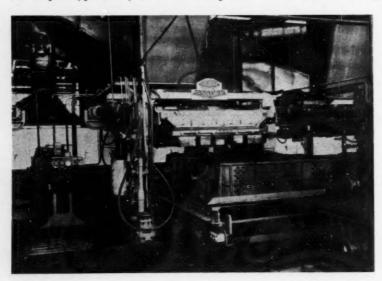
One of the 16 Jackman-Osborn Singlestation Type Automatic Mould-making Machines which are Arranged in Two Rows of Eight, Four being Employed for Drag and Four for Cope Half Moulds on Each Moulding Line
